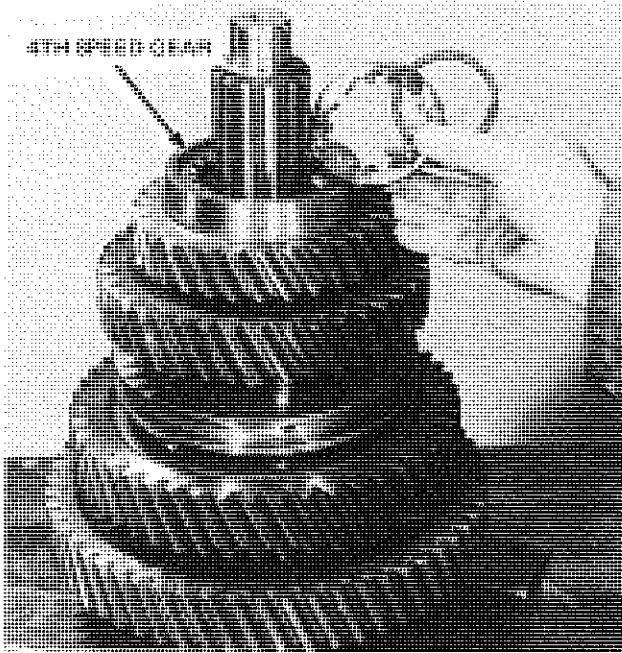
4th Speed Gear Thrust Washer and Snap Ring
